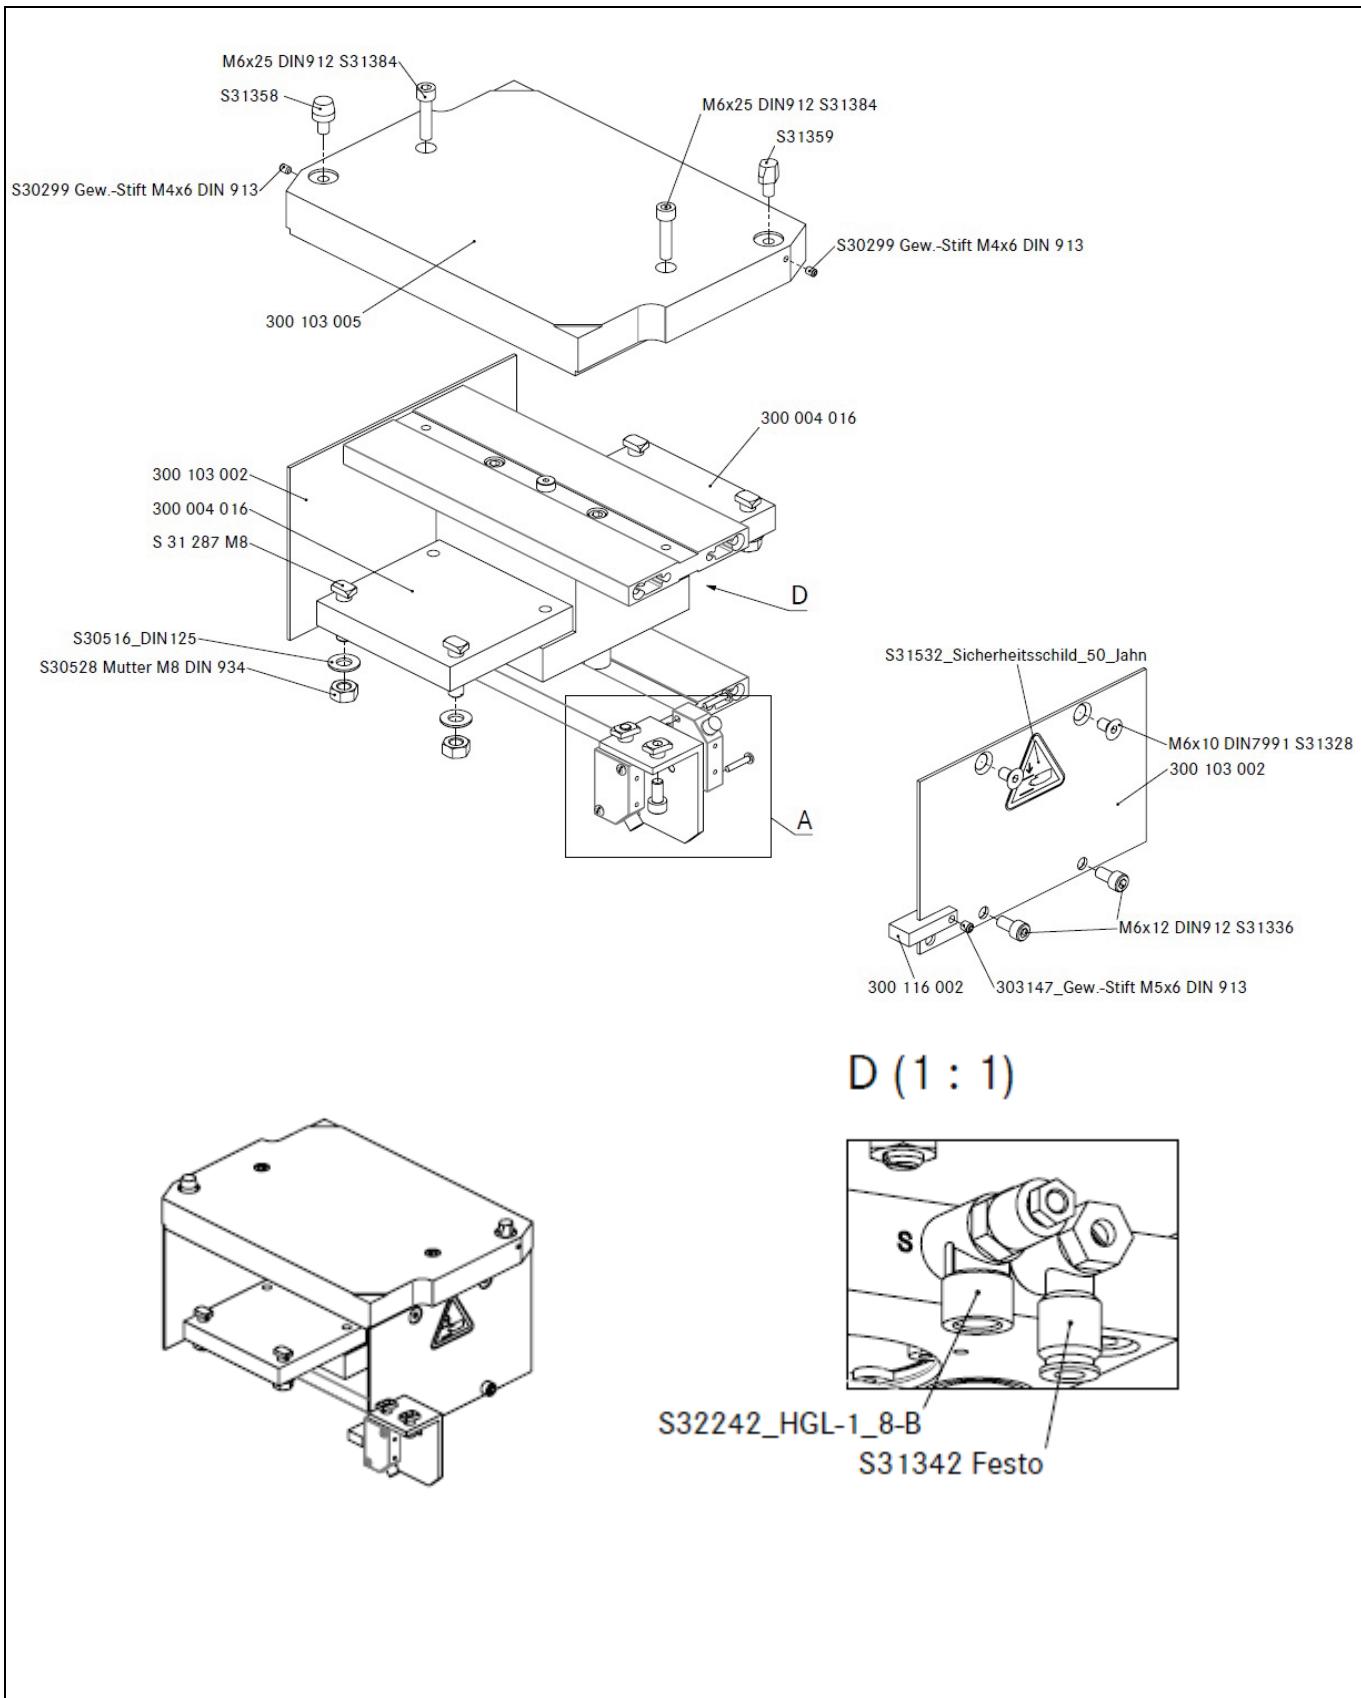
Lifting/centering device HZE with HGL valve - 930 138 001
